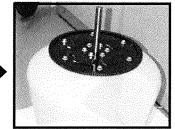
Slide bolts through drum attachment assembly and mixing drum by turning the drum onto its side.
